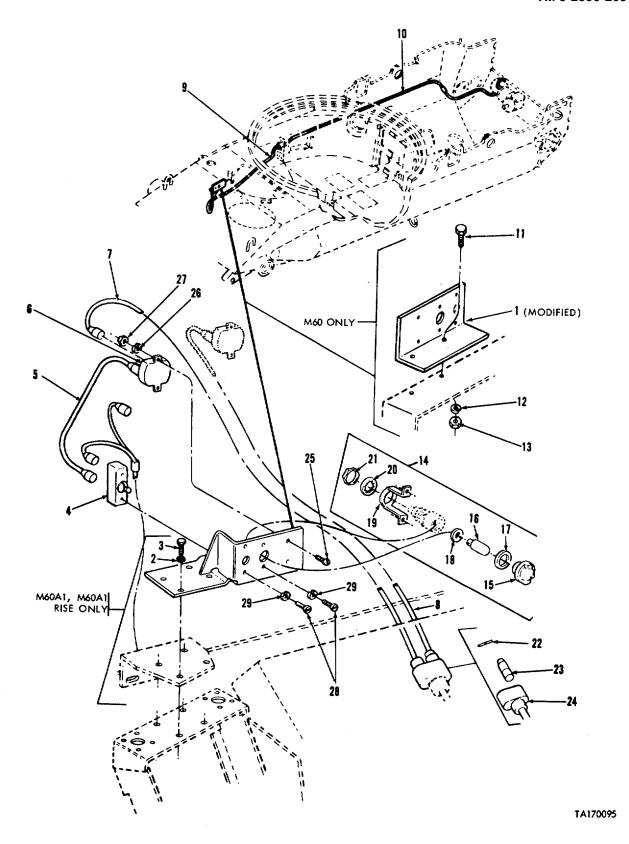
Power takeoff electrical switch, cables, and related parts (sheet 1 of 2).
